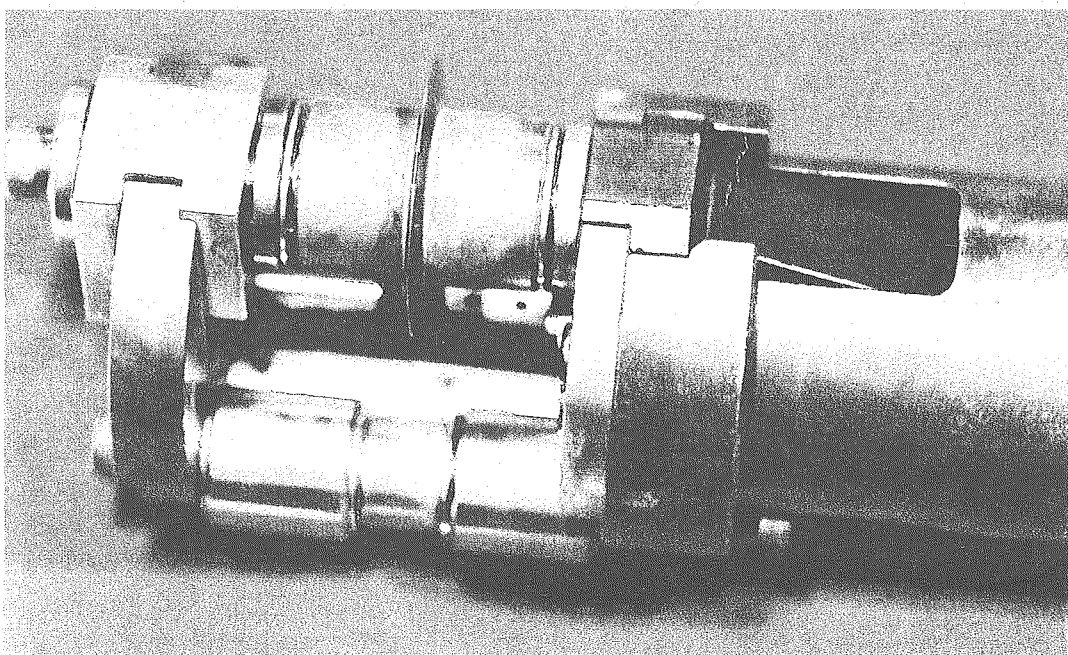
Configuration of Disc-Cutter Head for 100A-sch.40 pipe cutting.
